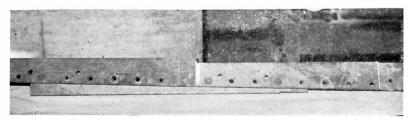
It is a recommended practice to bevel the ends to be welded and bolt the two pieces on another cutter bar until one side has been welded completely. This permits true alignment and correct spacing between guard bolt holes.
